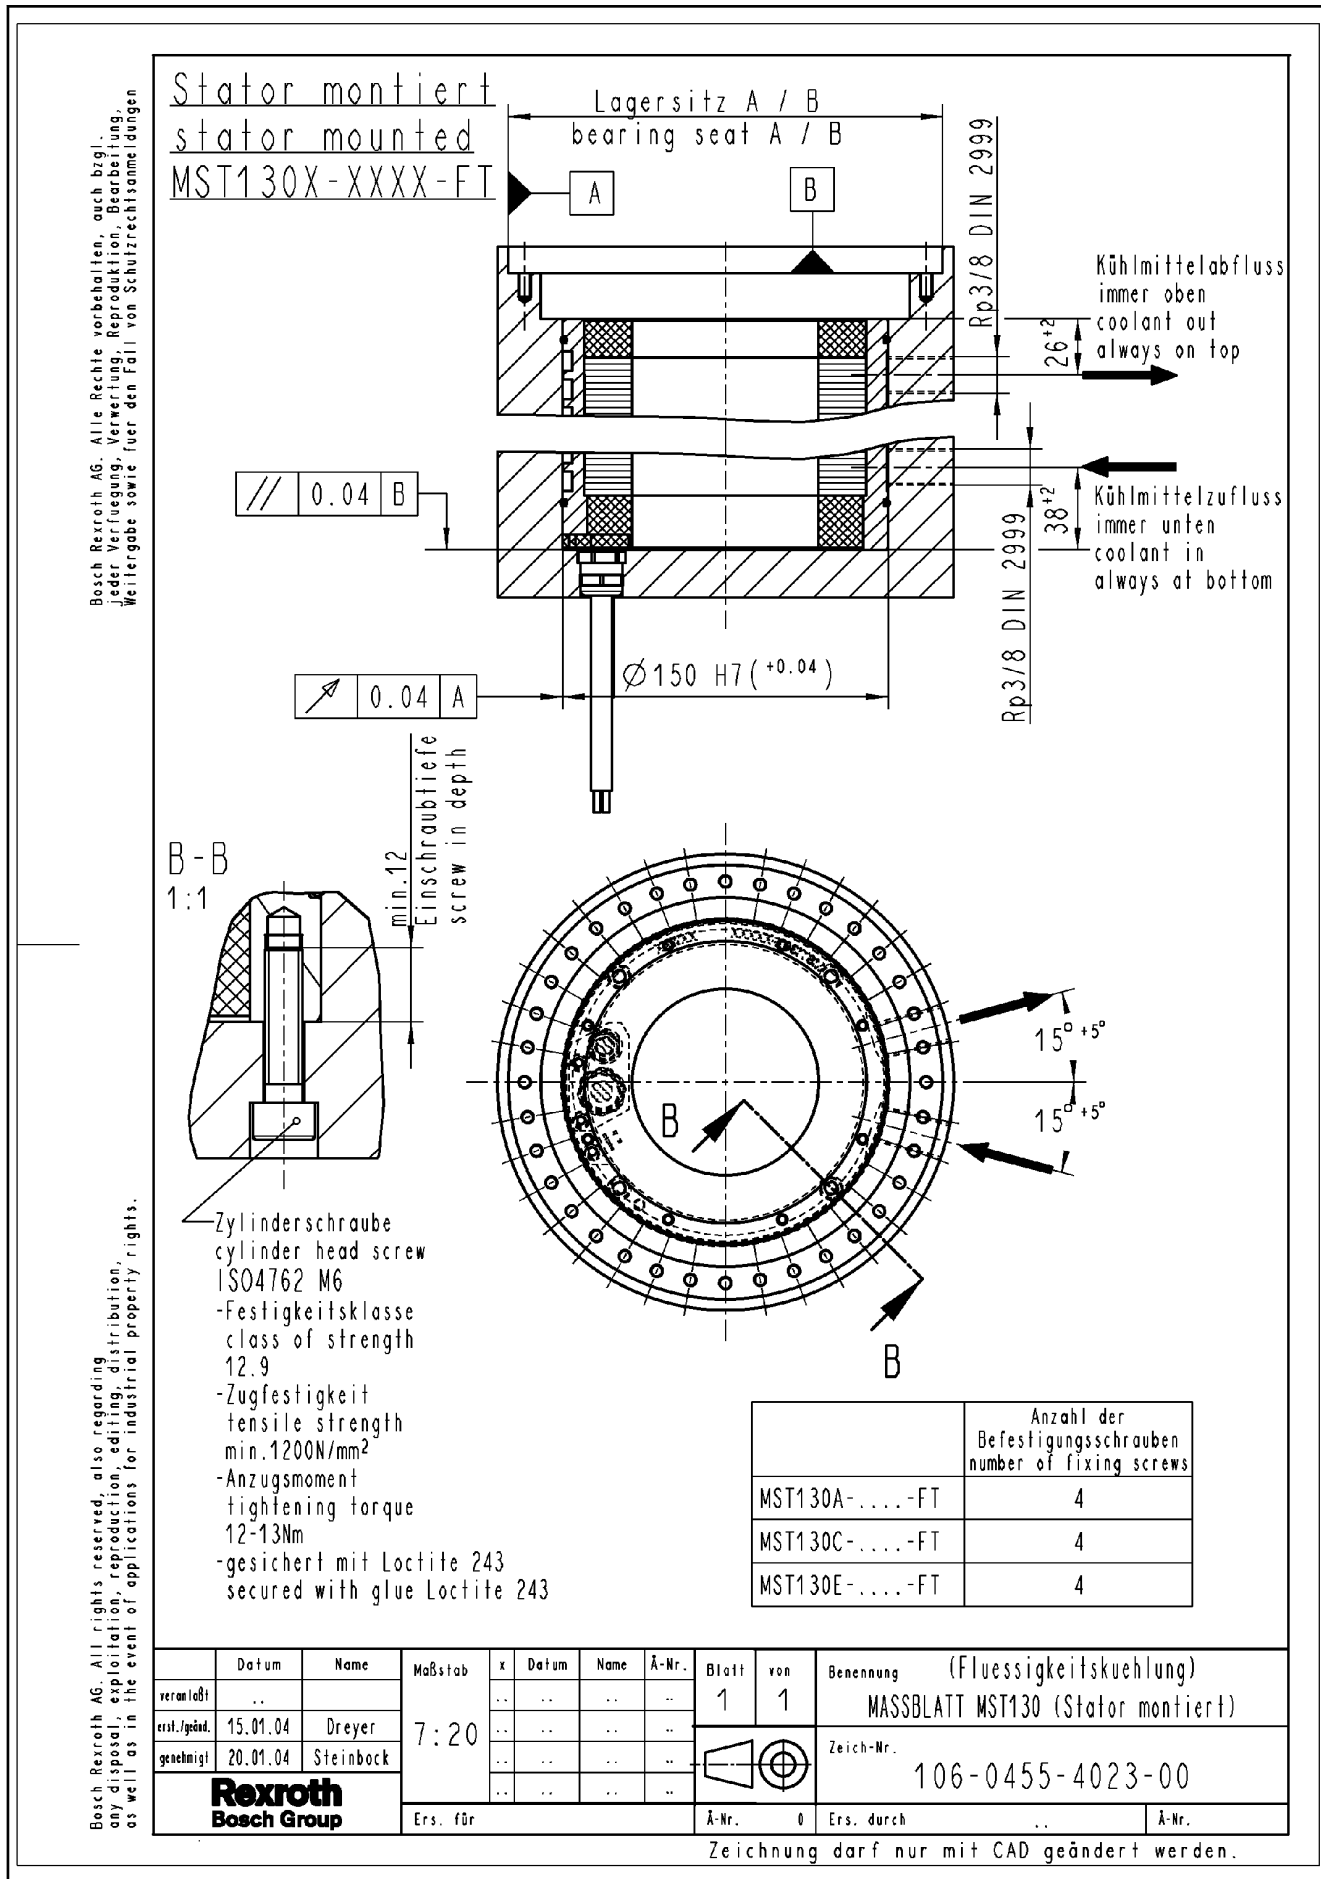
Dimension sheet MST130, liquid cooled, mounted
